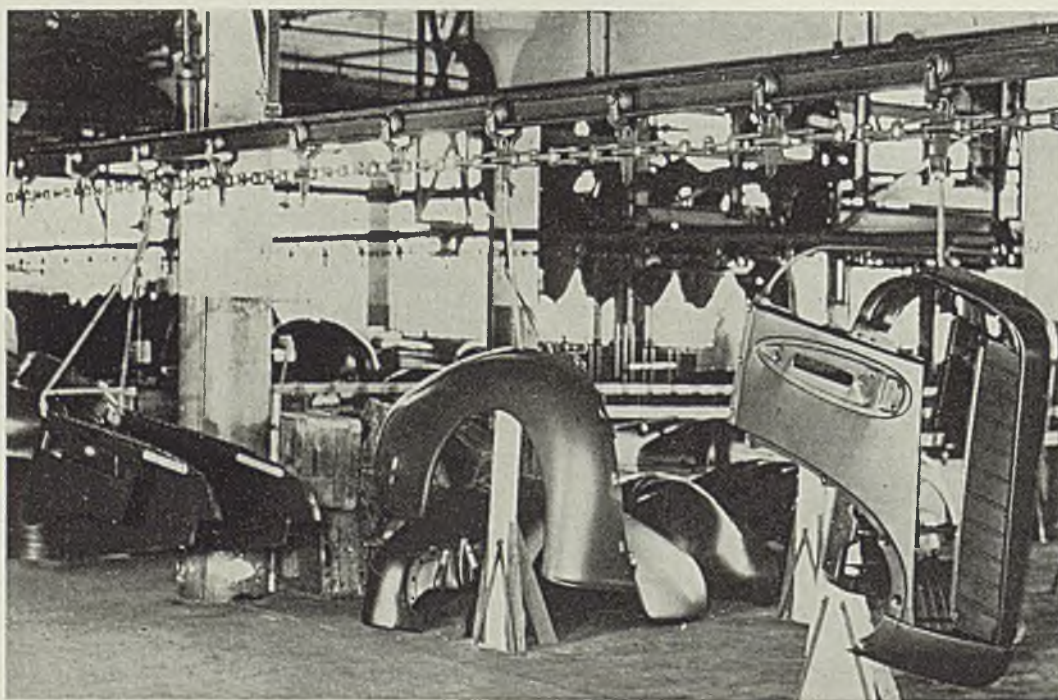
Shown here is a dual-purpose conveyor in the Buick plant, Flint, Mich., which handles radiator mounting strap and shell assembly, hood and fenders. Conveyor lines are synchronized with car assembly line so that items of particular color and specifications reach the assembly point at the proper time
